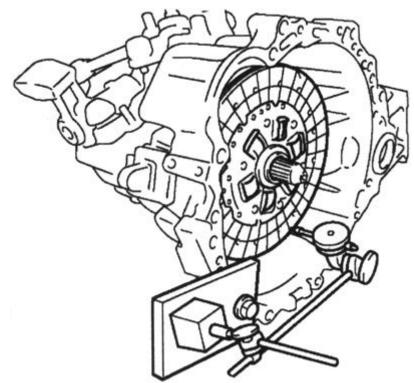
Installing slave drive clutch to the shaft of the gearbox
